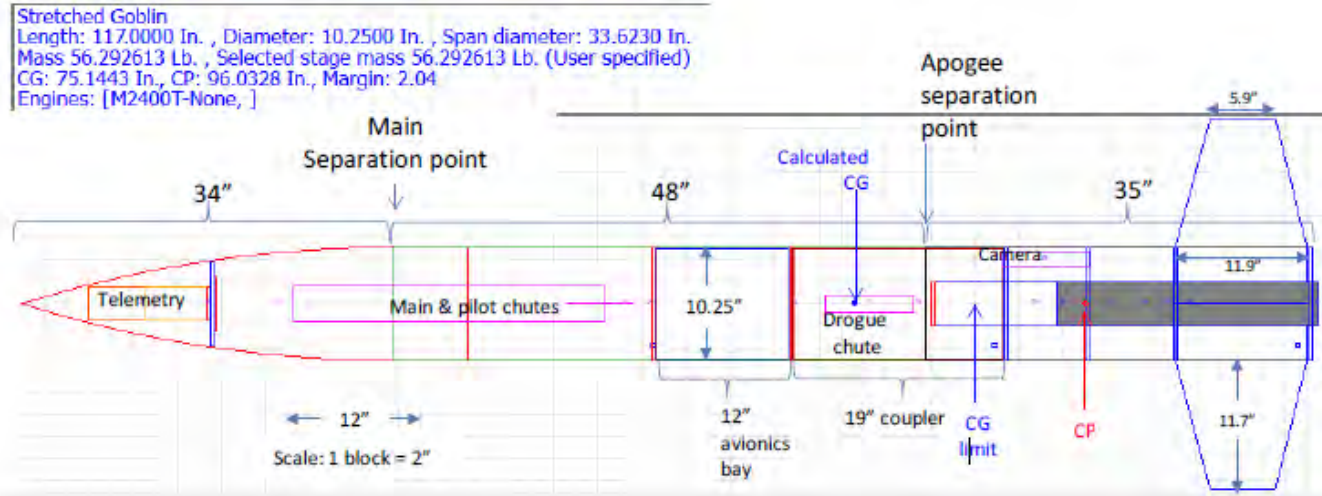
Scale drawing of vehicle showing key dimensions, separation points, and major components.
